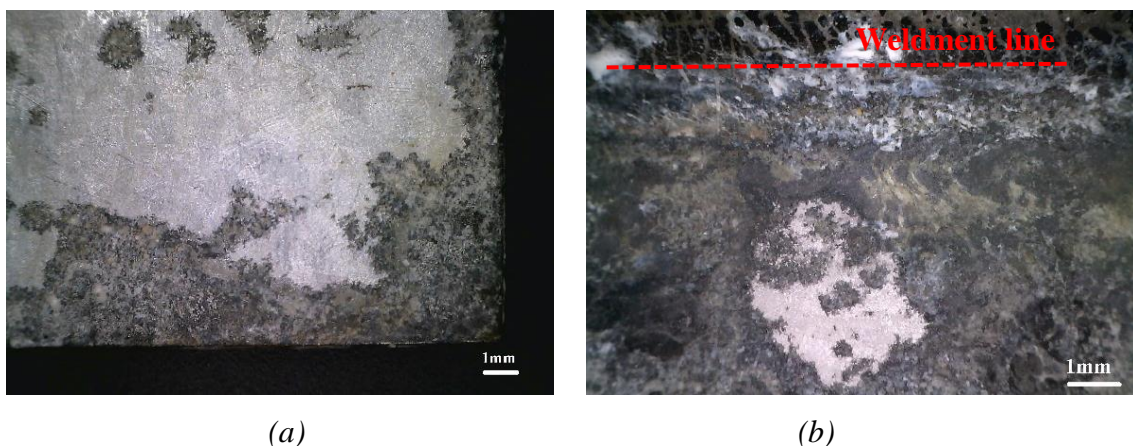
Degrading zinc protection layer on galvanized steel, (a) at edges of galvanized steel, (b) at weld zone.
